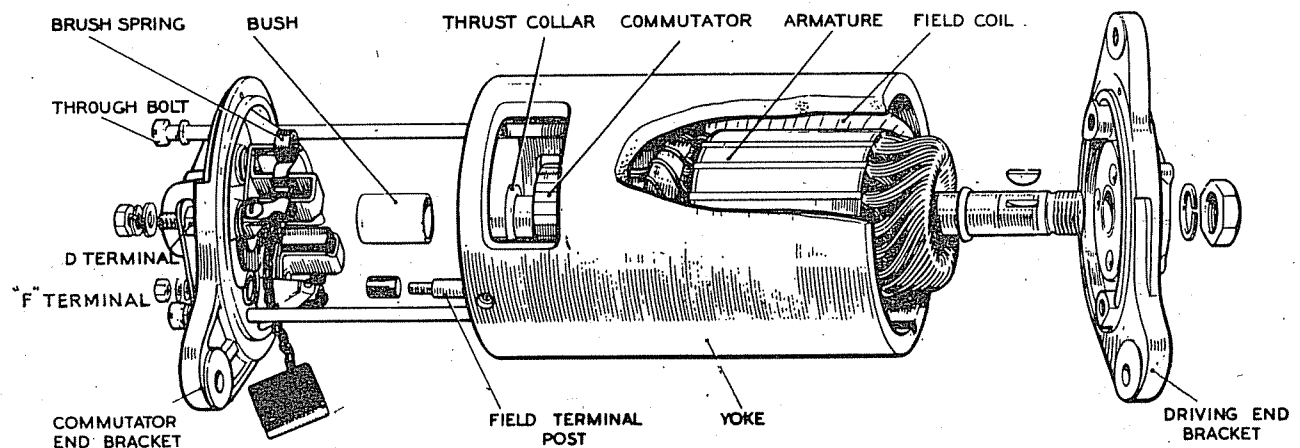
Generator Dismantled View (Yoke cut away to show interior).
